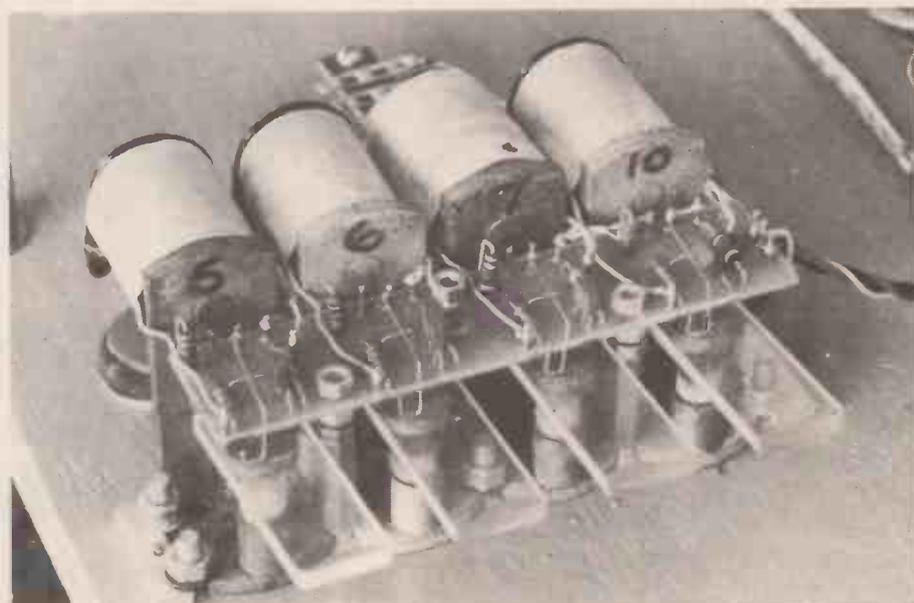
Prototype assembly of four single-magnet tabs. The p.c.b., type EO3, accommodates 8 circuits, but can be cut down as shown.
